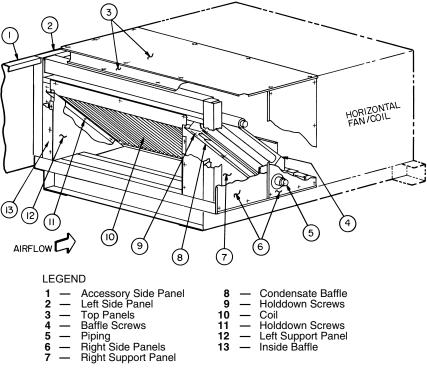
Horizontal Unit Slant Coil Removal (39LA Units — Sizes 03-21)
